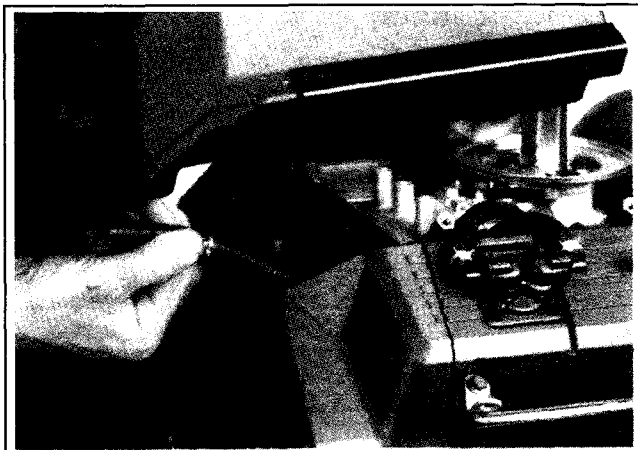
Connecting Fuel Line to Shut-Off Valve (Top Mounted Tank).
